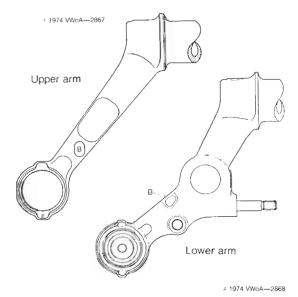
Marking locations for torsion arms with oversize ball joint holes.
